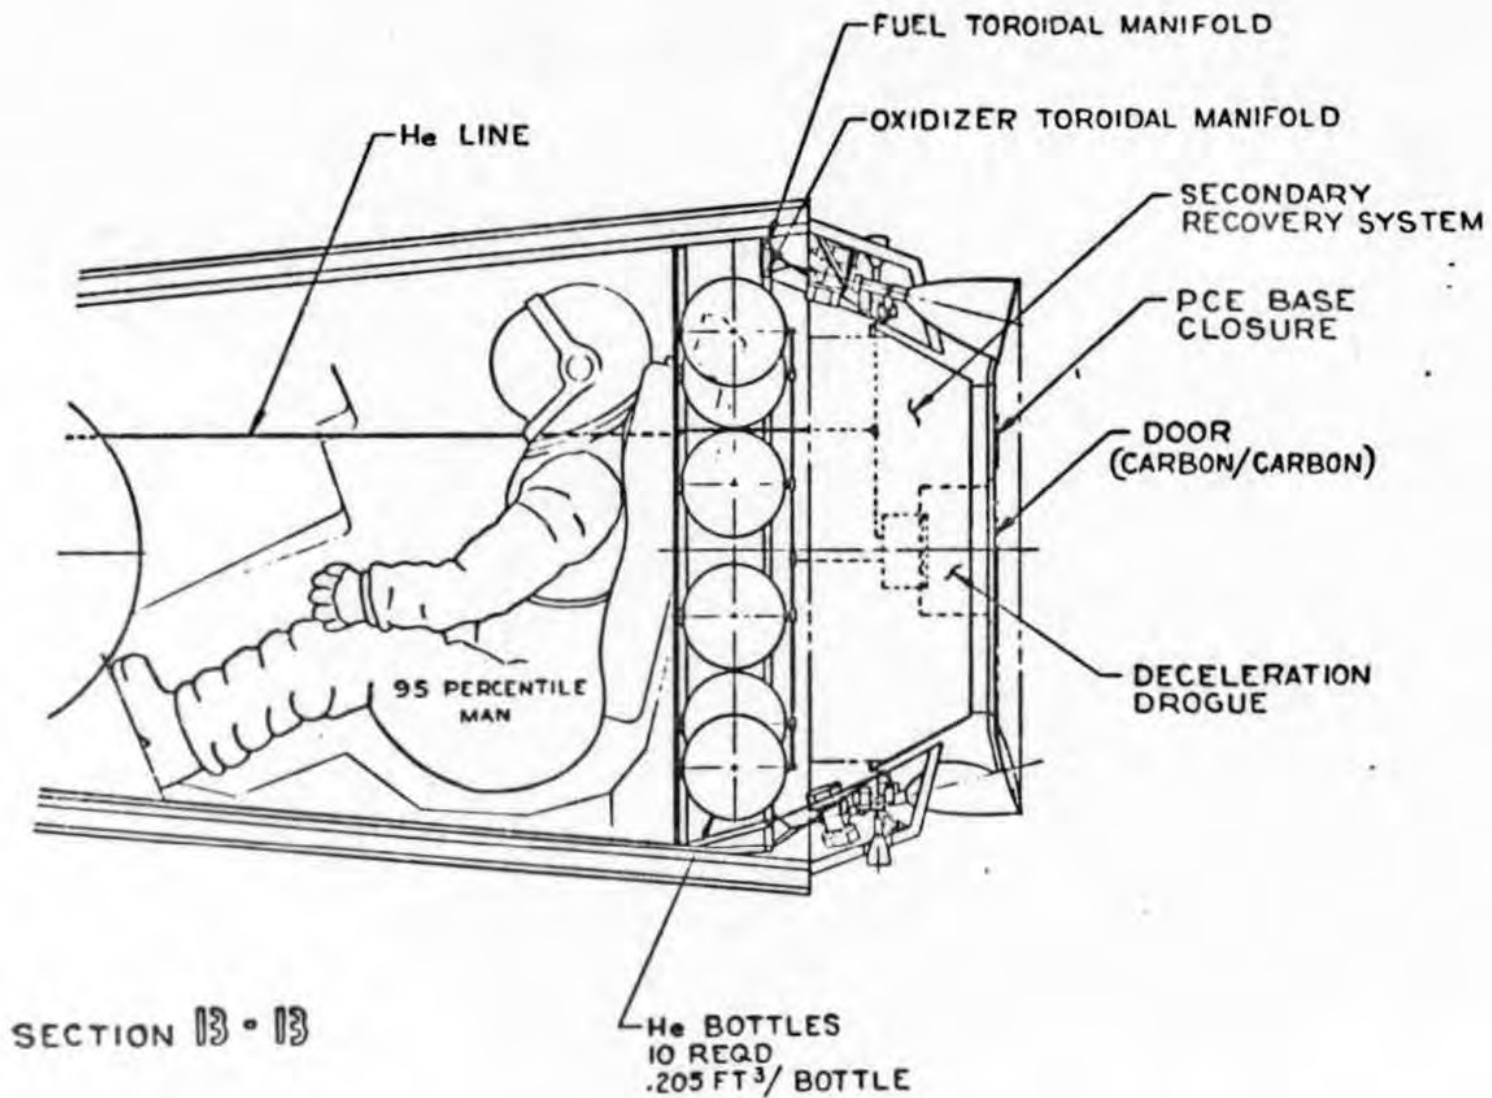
N₂O₄/MMH Plug Cluster Engine (Side View)
